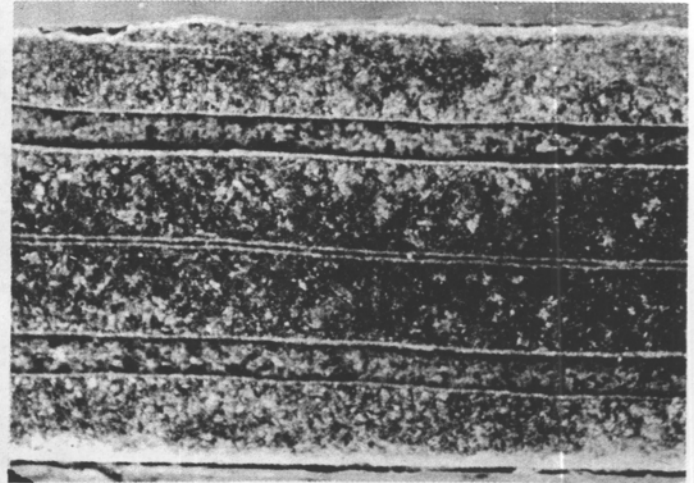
Macrostructure. Cross section of the bar after cycle No 1 (ie. one folding and forge welding operation). Two streaks of nickel rich steel appear. The seam from the last forge welding separates the soft material in the middle into two halves. 10x.
